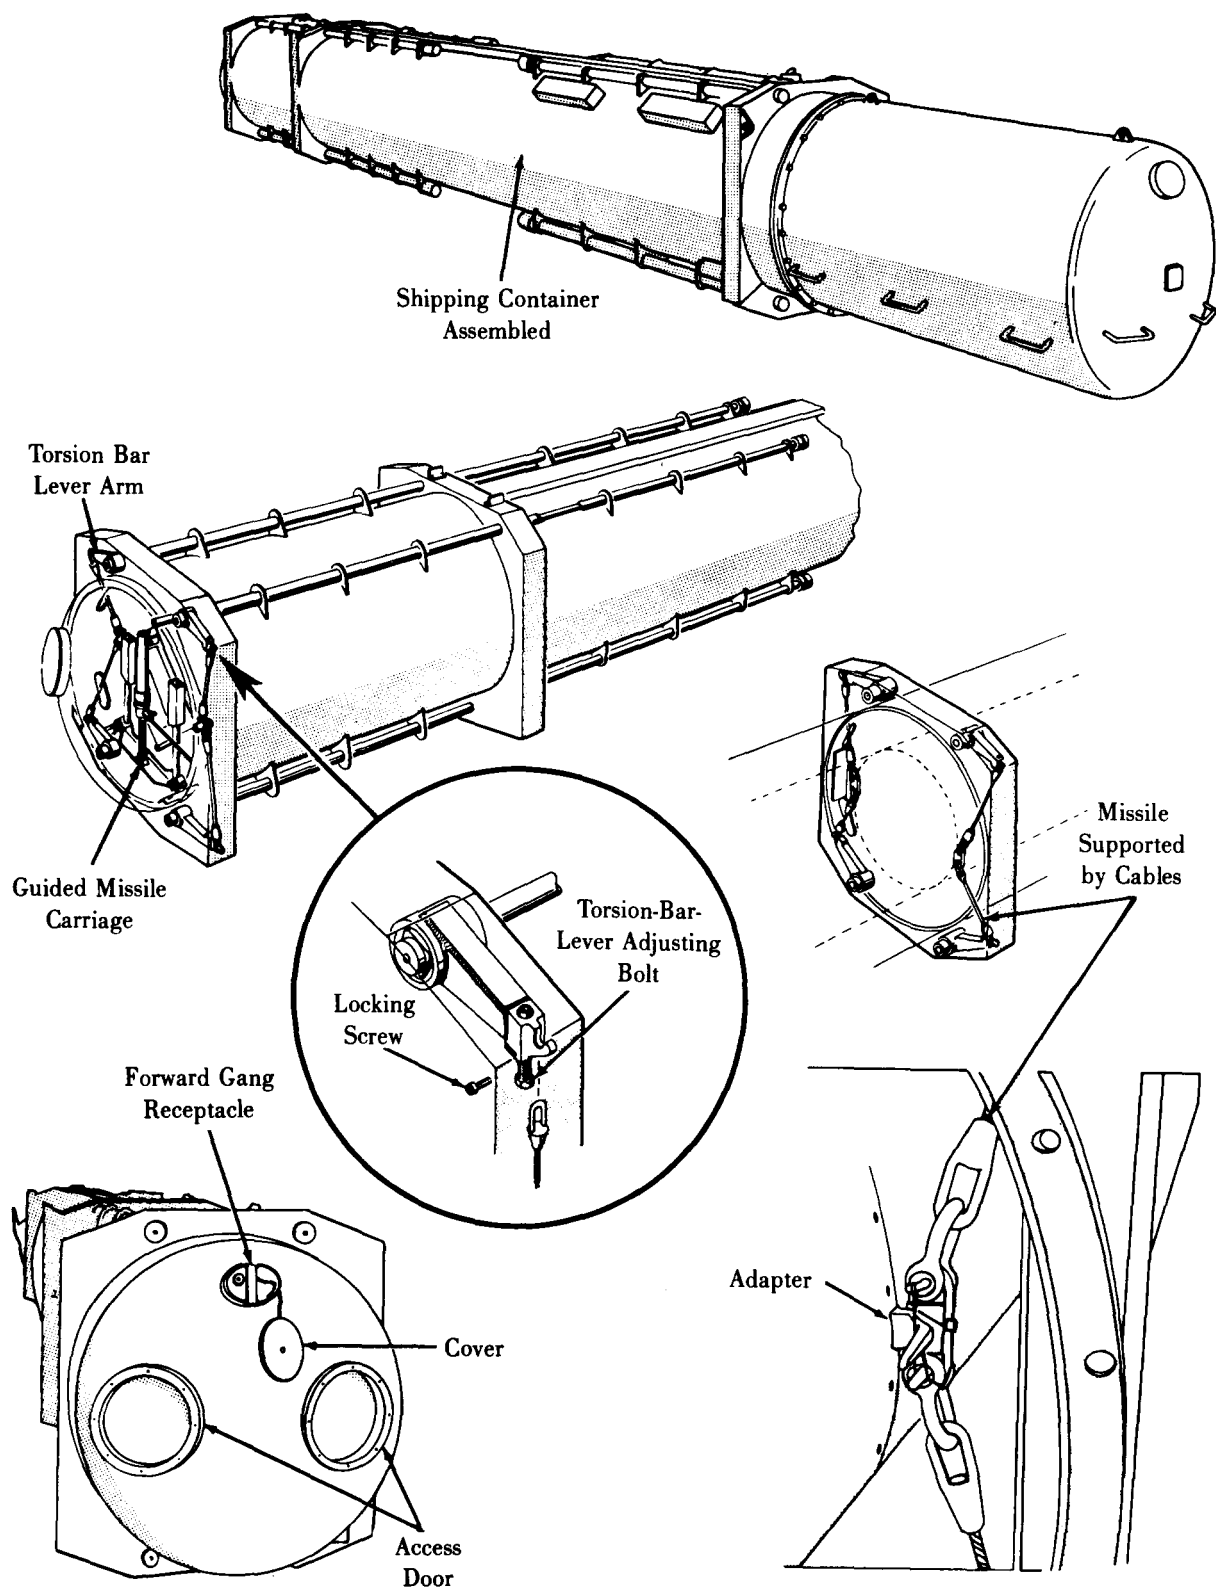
CORPORAL Missile Shipping Container—Partially Exploded View
